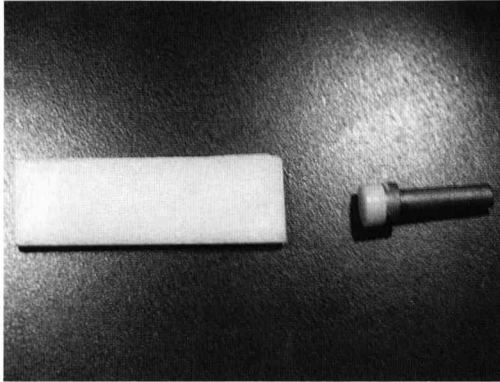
Photograph of specimens for bending test (left) and shearing test (right).
